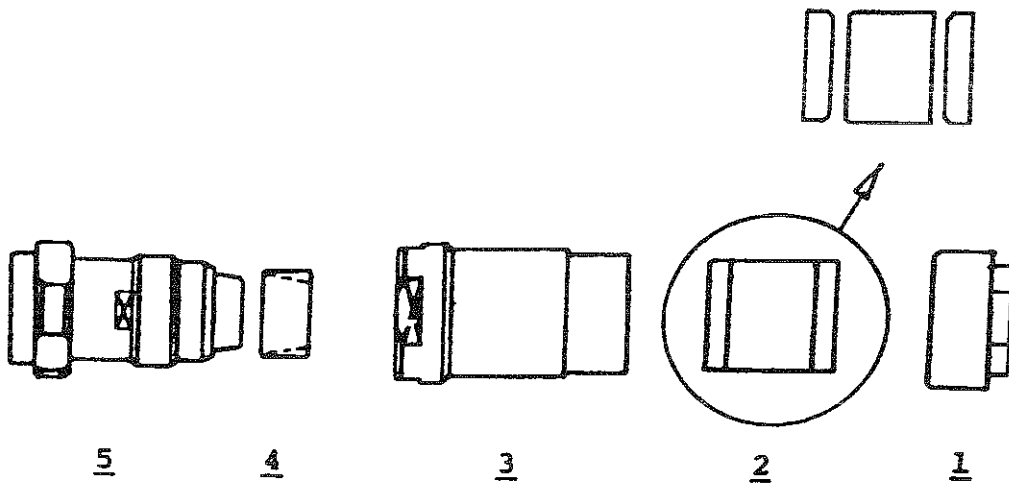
POSITION BACK END FITTINGS ONTO CABLE IN THIS ORDER
